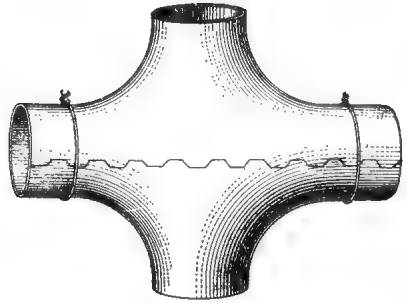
Four-Way Piece Made of Two Pieces, Seams on Side.
